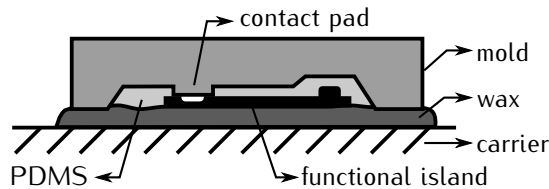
Closing of the mold onto the contact pad to create an opening in the PDMS encapsulation. Drawing dimensions are not to scale.
